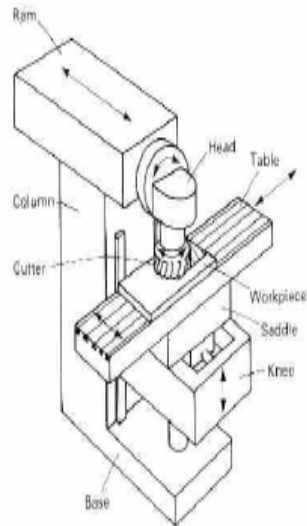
Principal components of the ram-type knee-and-column milling machine. This ram can be moved in a direction parallel to the saddle movement.
